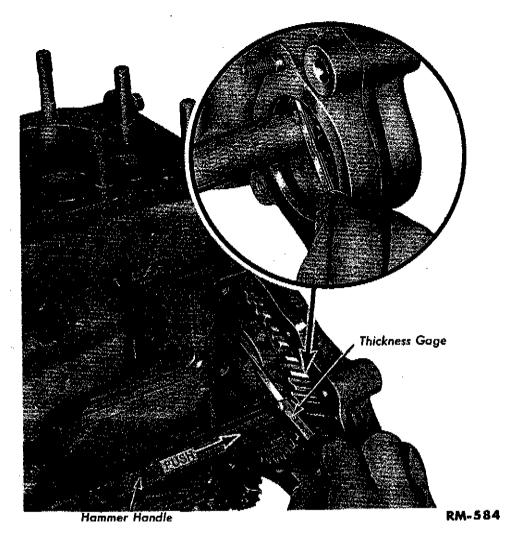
Measuring Clearance Between Camshaft Gear and Cylinder Block
